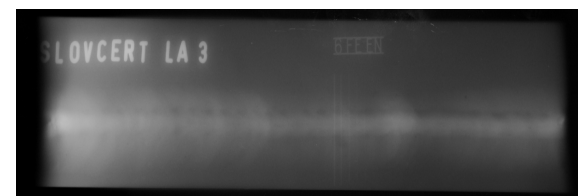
Record of weld sample No. 2 by radiography method
